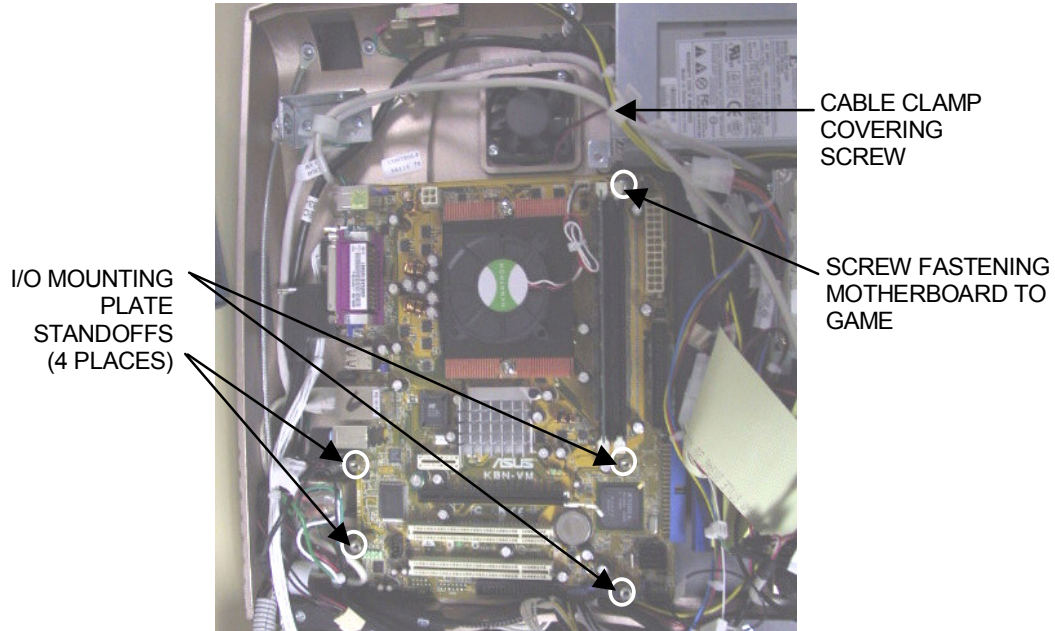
ASUS MOTHERBOARD ASSEMBLY (4 STANDOFFS & 1 SCREW)
